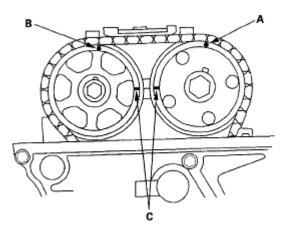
Identifying Punch Mark On Variable Valve Timing Control (VTC) Actuator Courtesy of AMERICAN HONDA MOTOR CO., INC.
